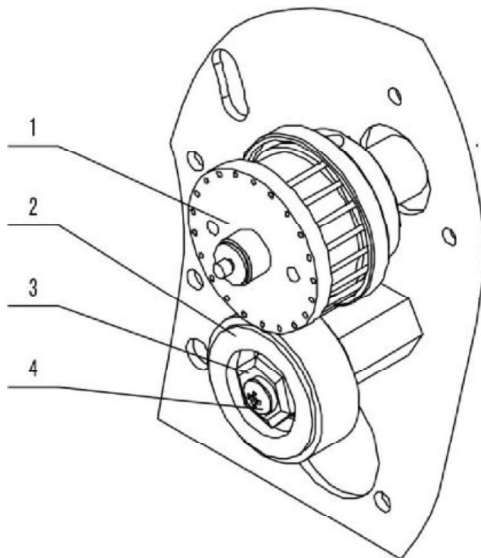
(1) Printing Wheel, (2) Silicone Wheel, (3) Eccentric Sleeve, (4) Screw
